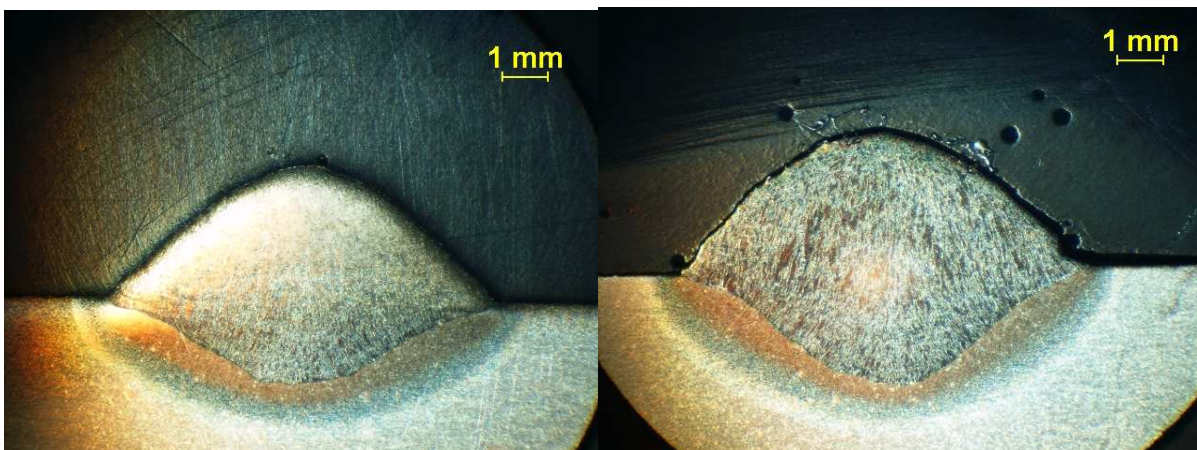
Macrostructure of weld using gas CO₂; left Pulsed transfer, right Dip transfer.
